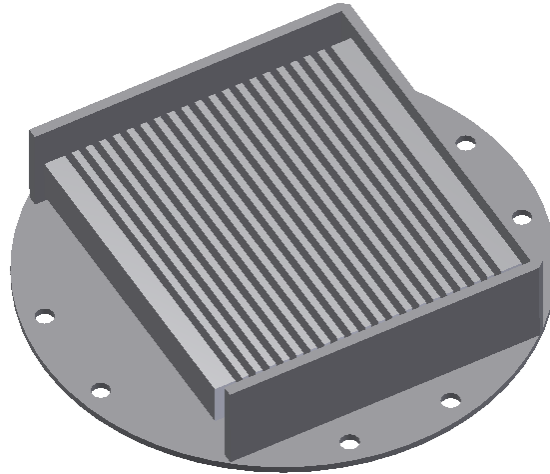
CAD drawing of the first version LiMIT trenches for SLiDE experiment
